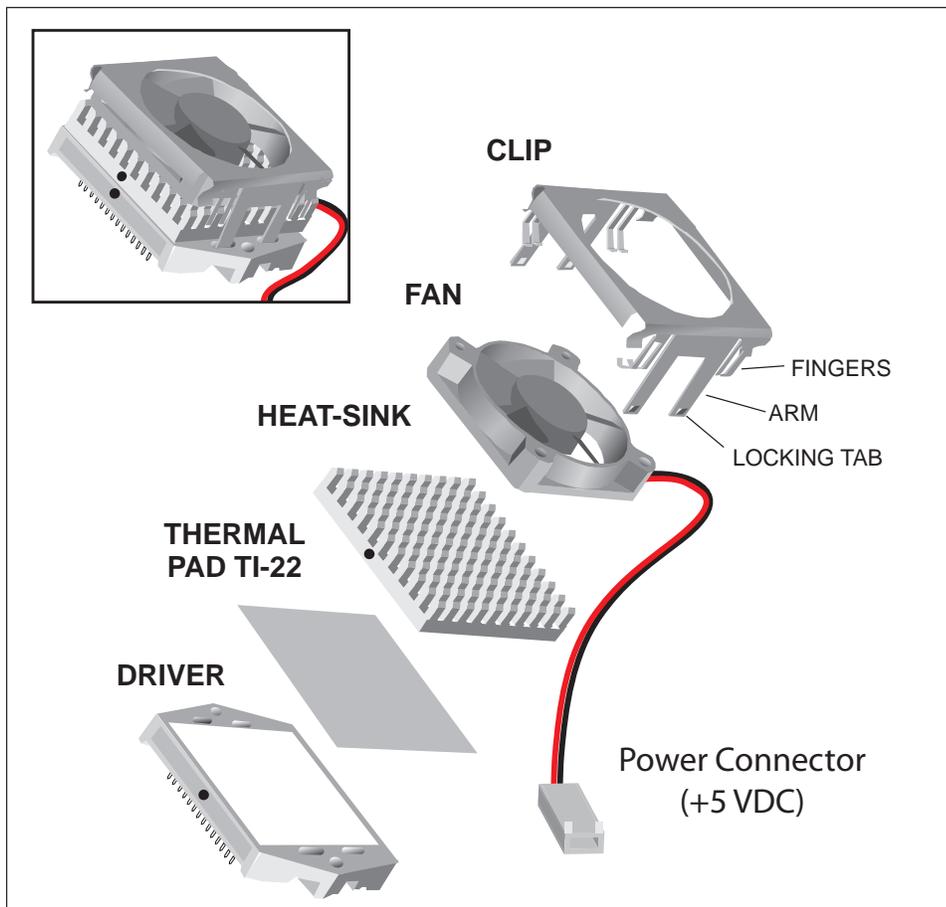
HFC-22 Heat Sink/Fan/Clip Assembly
